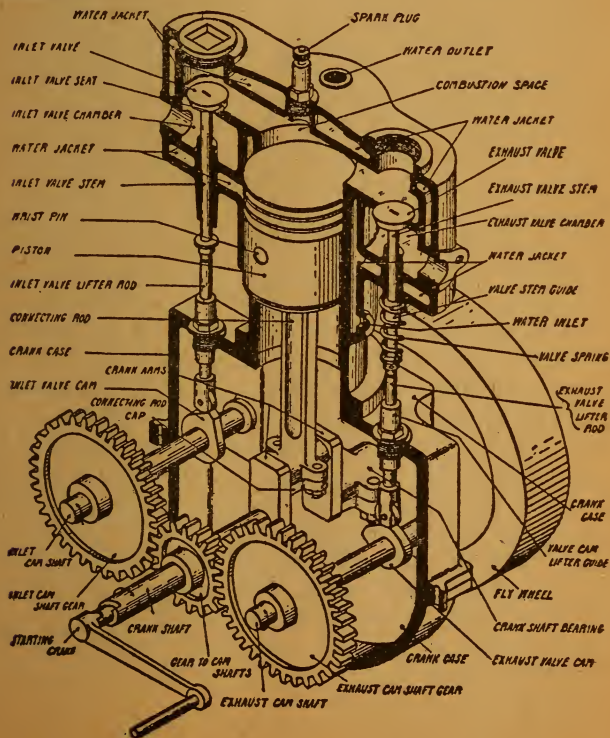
Sectional view of a single cylinder engine, illustrating the valve mechanism and its relation to other parts.
